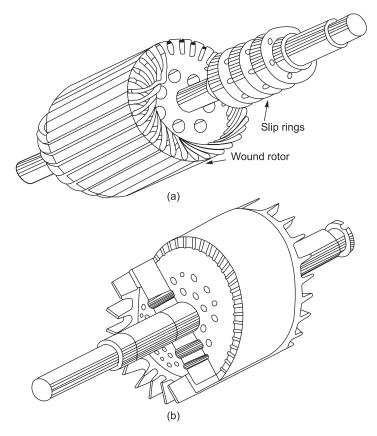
(a) Wound rotor for induction motor (b) Squirrel-cage rotor with cast aluminium bars and end rings
